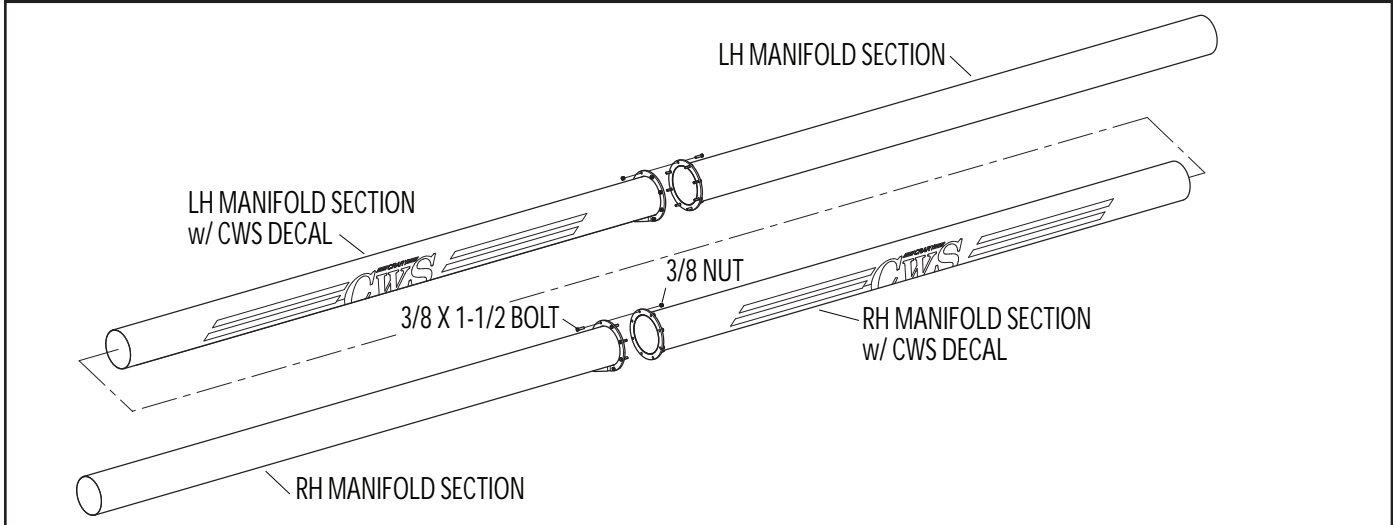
45FT Manifold assembly (FD70 & CIH 2162 headers)
